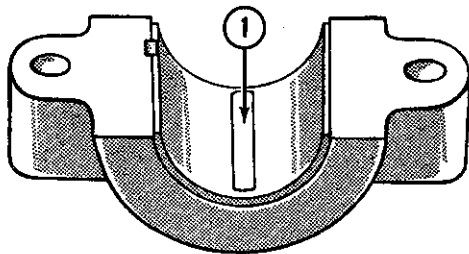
CHECKING MAIN BEARING CLEARANCE WITH PLASTIGAGE
